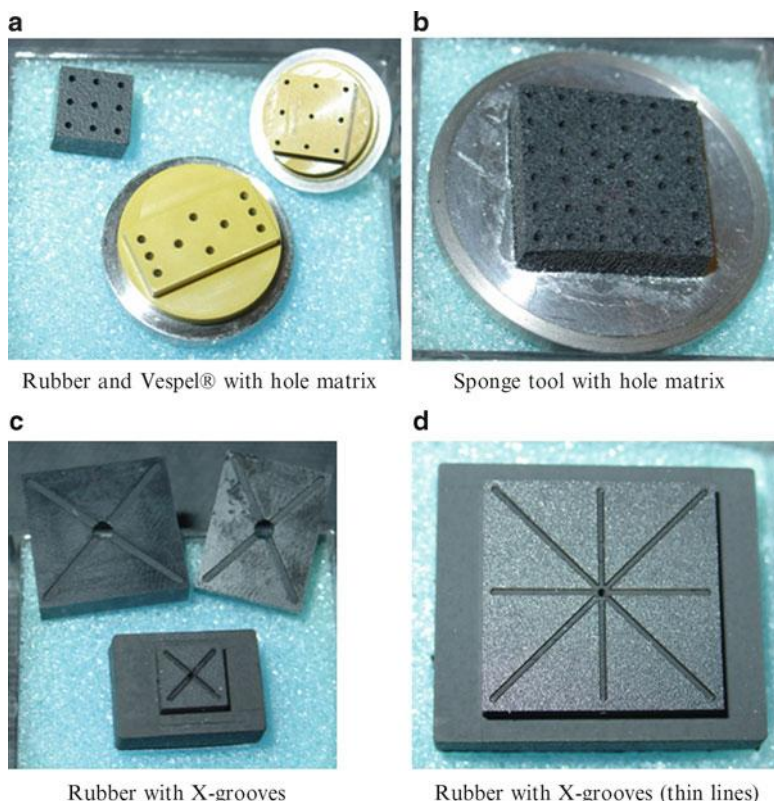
Pickup tools for thin die handling. (a) Rubber and Vespel® with hole matrix, (b) Sponge tool with hole matrix, (c) Rubber with X-grooves, (d) Rubber with X-grooves (thin lines)
